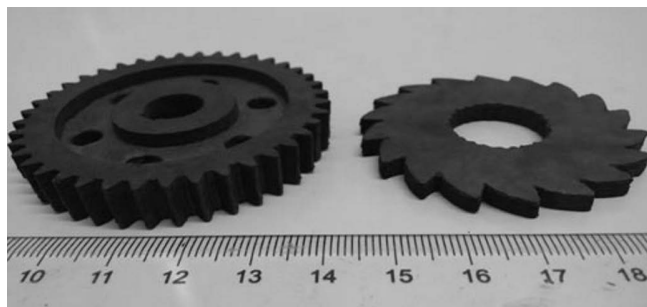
The 3-dimensional-shape gear wheels fabricated by means of LOM after heat treatment.
